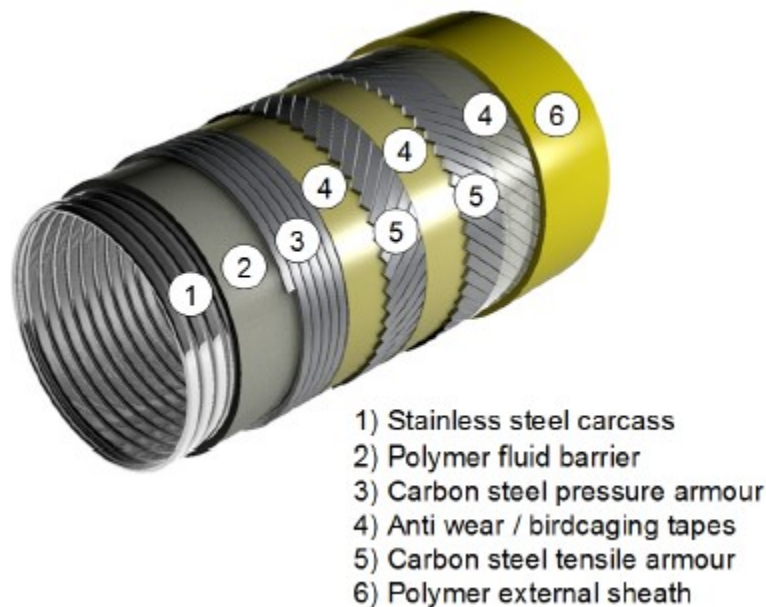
Typical non-bonded flexible riser cross section (Berge et al. [7])
